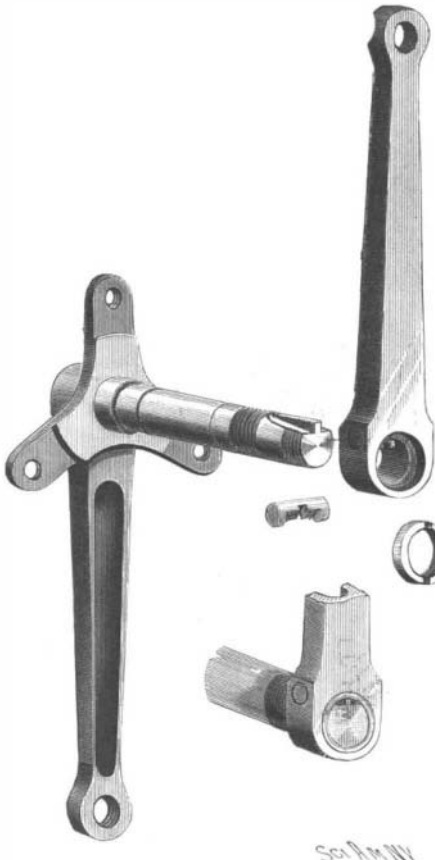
CRANK DETAILS SHOWING METHOD OF ATTACHMENT TO AXLE.
